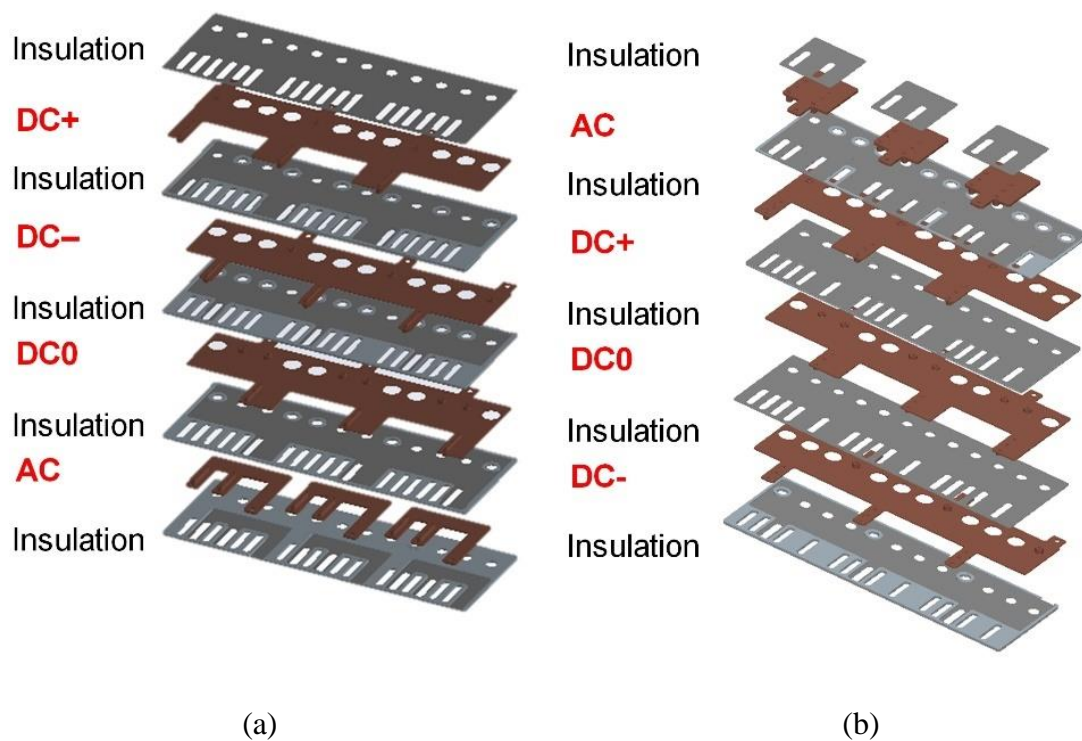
Exploded view of two bus bar designs (a) Design I and (b) Design II.
